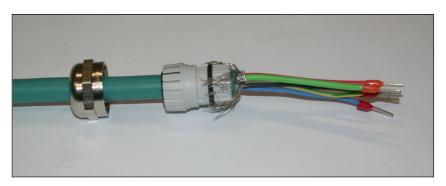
Example: Pre-assembled cable for PROFIBUS
